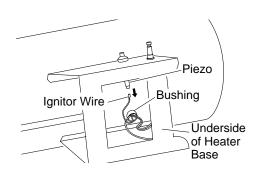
Removing Ignitor Wire from Piezo Ignitor
